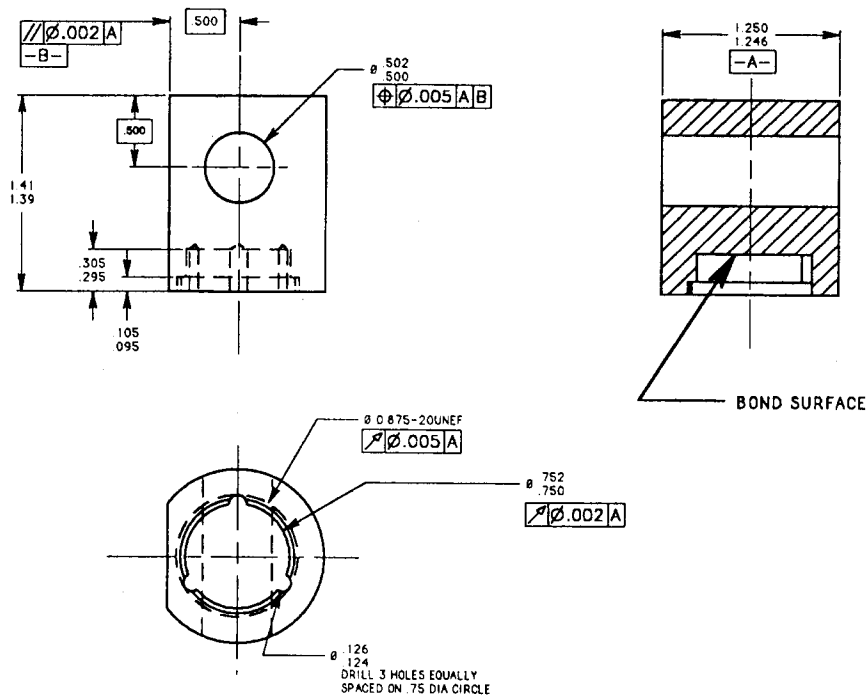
A gripping fixture depicted above was bonded to each end of the through-the-thickness specimens.
